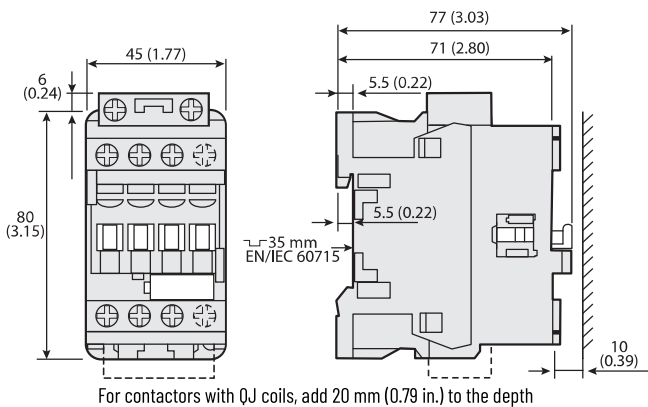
100-E09...100-E16 Contactors with Standard Coils and Side-mounted Auxiliary Contact
